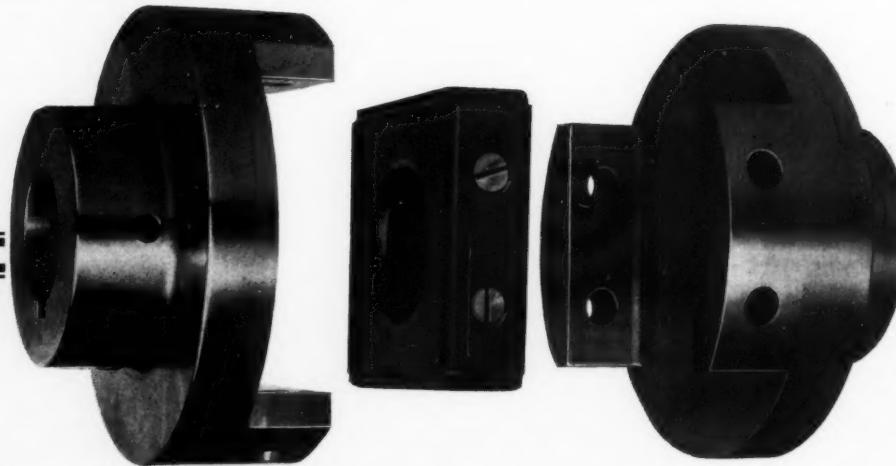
Power take-off drives attachments from wringer shaft of washing machine
